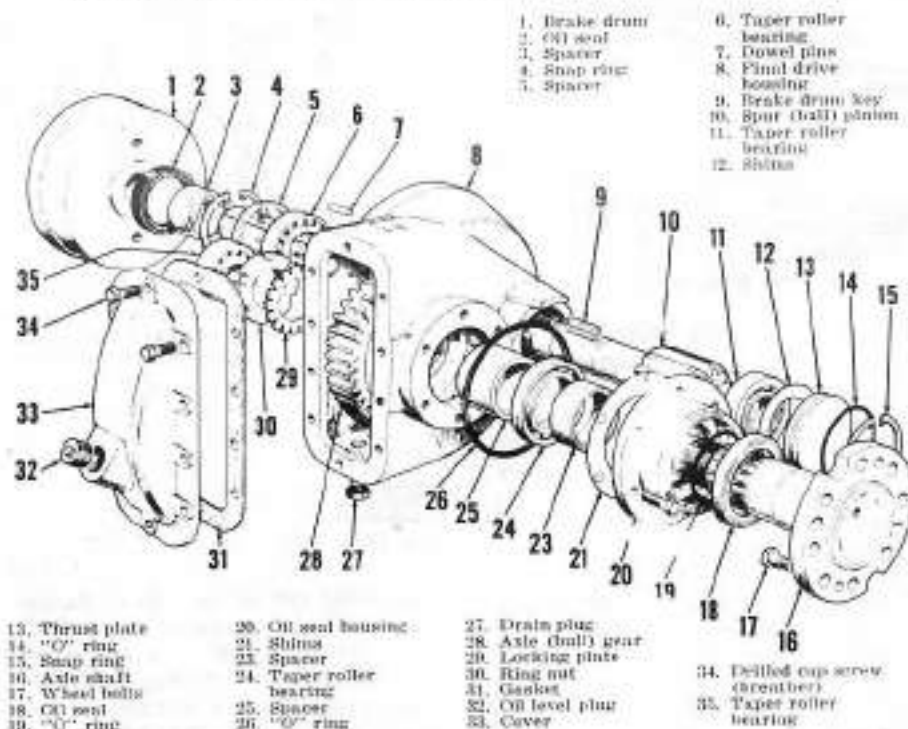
Exploded view of final drive assembly for models 880 and 4600. On these models, an "O" ring (19) is fitted in bore of oil seal housing (20) to prevent oil seal cleaning grease from entering final drive housing; all other models use a grease baffle at this location.
